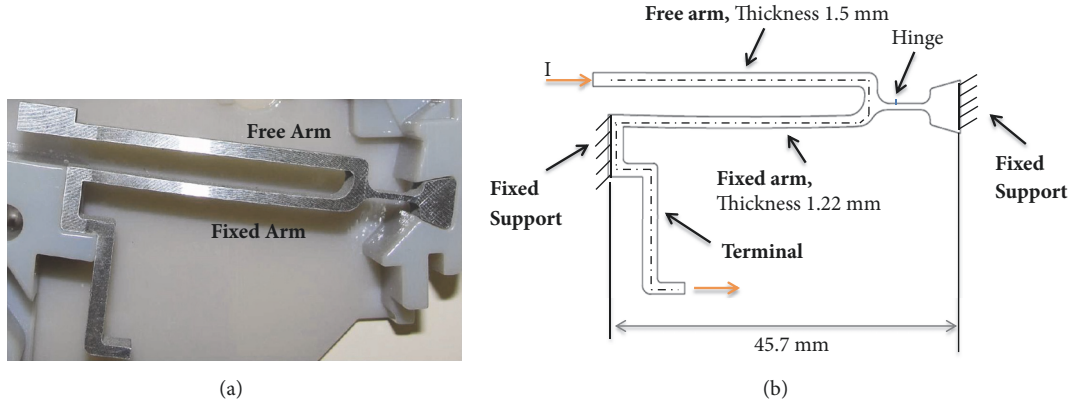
(a) U-shaped thermosensitive compliant mechanism. (b) Dimensions of mechanism.
